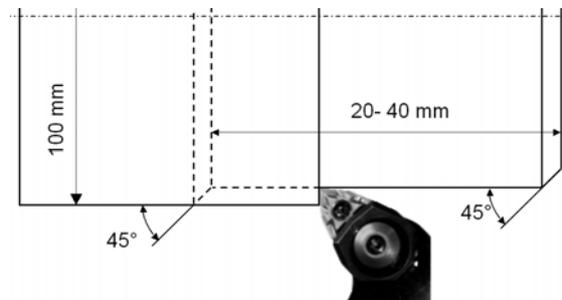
Workpiece preparation and scheme of cut in tool life testing
